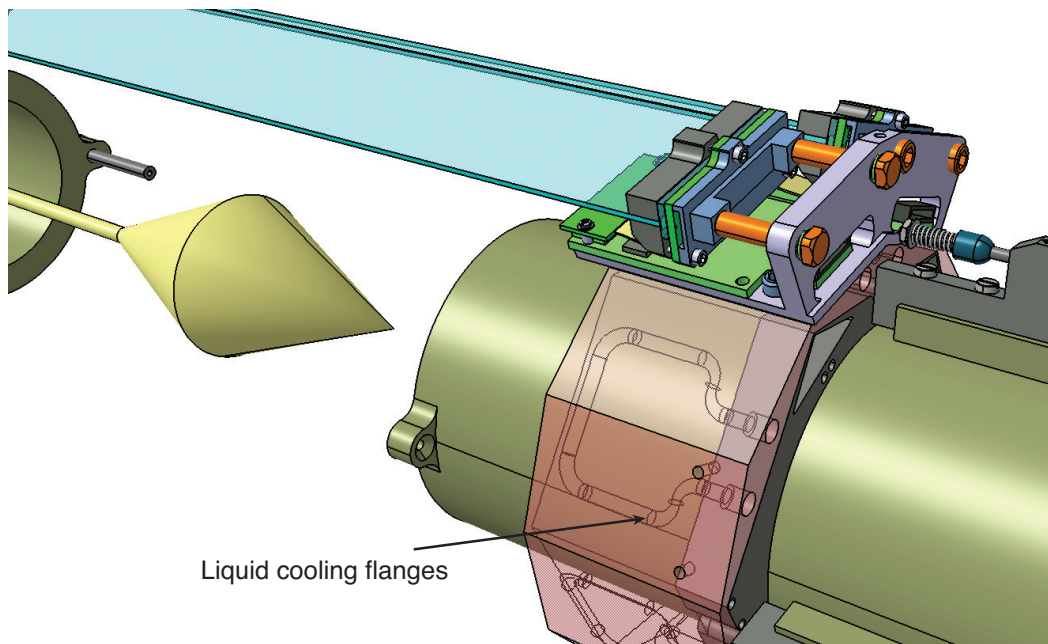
The SciFi modules assembled in advance attach rigidly to the support ring. The cooling flanges running inside the ring are also shown.
